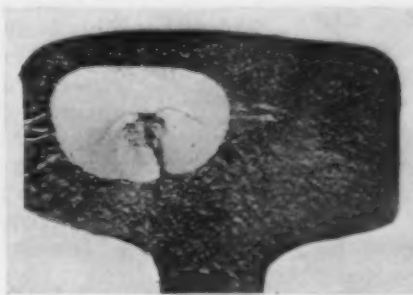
Open-Hearth Steel Rail Showing Development of Internal Transverse Crack
